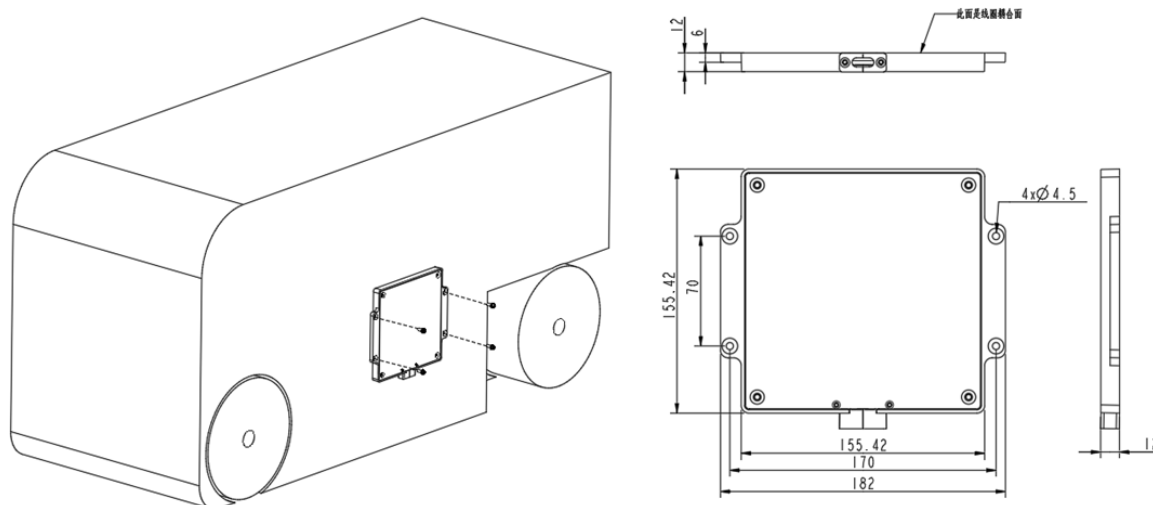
Example installation on a vehicle (dimensional drawing, dimensional unit: mm)
